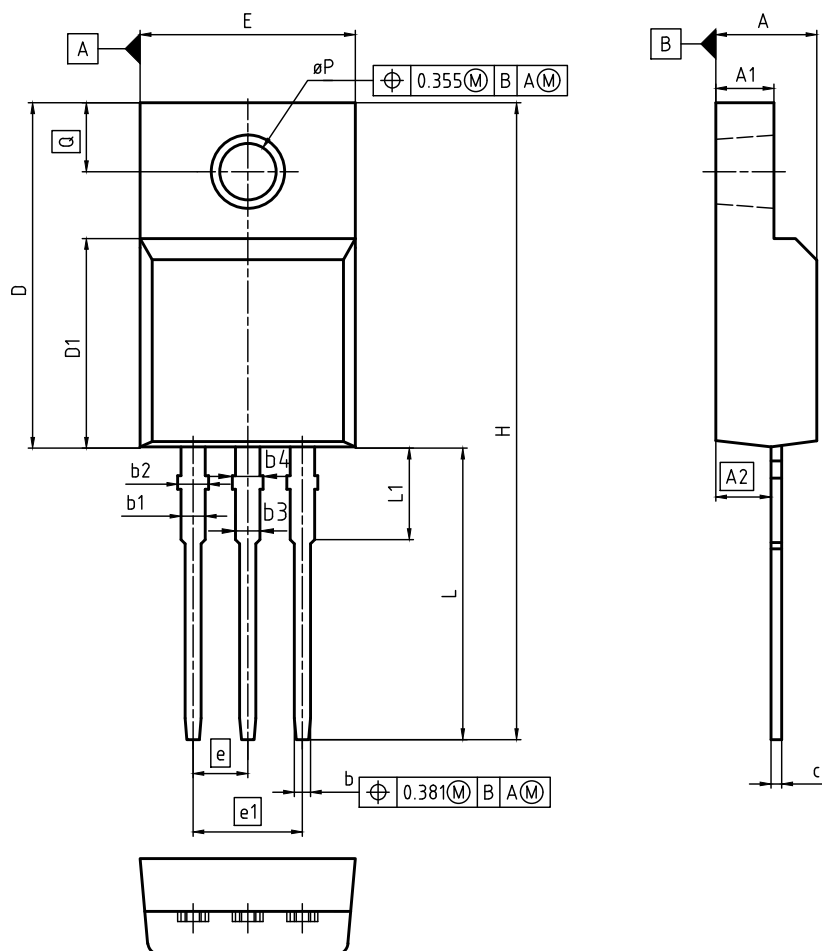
Outline PG-TO 220, dimensions in mm/inches
